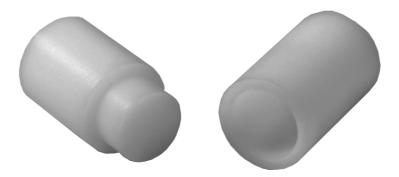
01-307M and 01-307F Cable Soldering Fixtures
